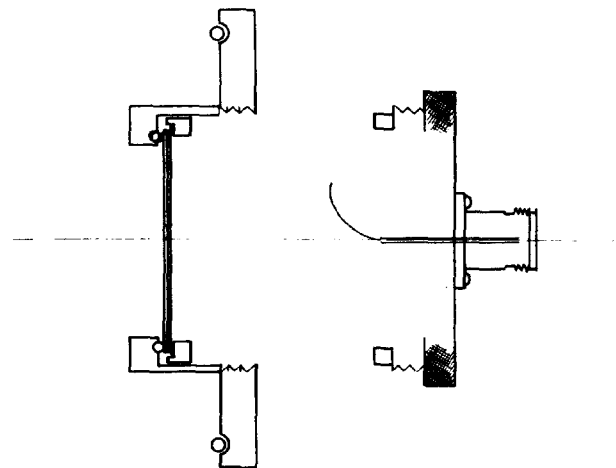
Schematic, cross sectional view of the ultrasonic transducer assembly. The stainless steel assembly supports a ceramic disk such that the air backed side has a gold foil positioned between the disk and the support ring. The screw-in backplate compresses the ring against the gold foil and disk. The front surface of the disk, in turn, compresses an O-ring to provide, simultaneously, a liquid seal and contact with the stainless steel.
